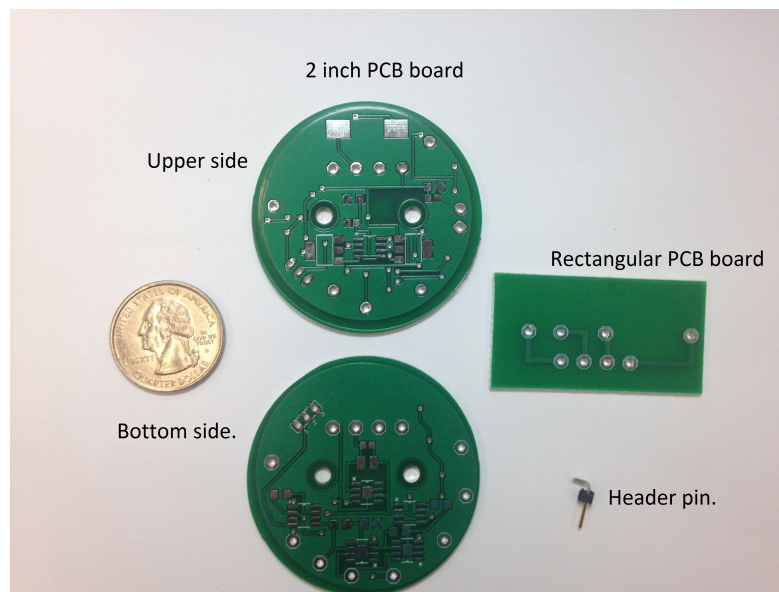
Refined PCB design to achieve more compact integration of transmitter/receiver circuits.
